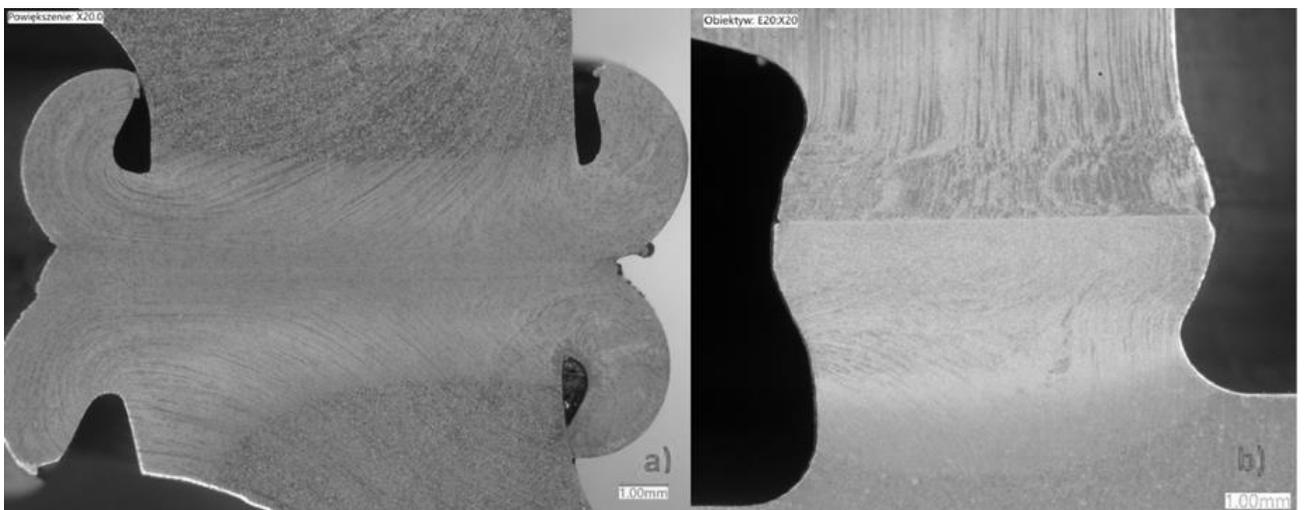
The weld is made a) by friction butt welding, b) by friction welding with low pressure
